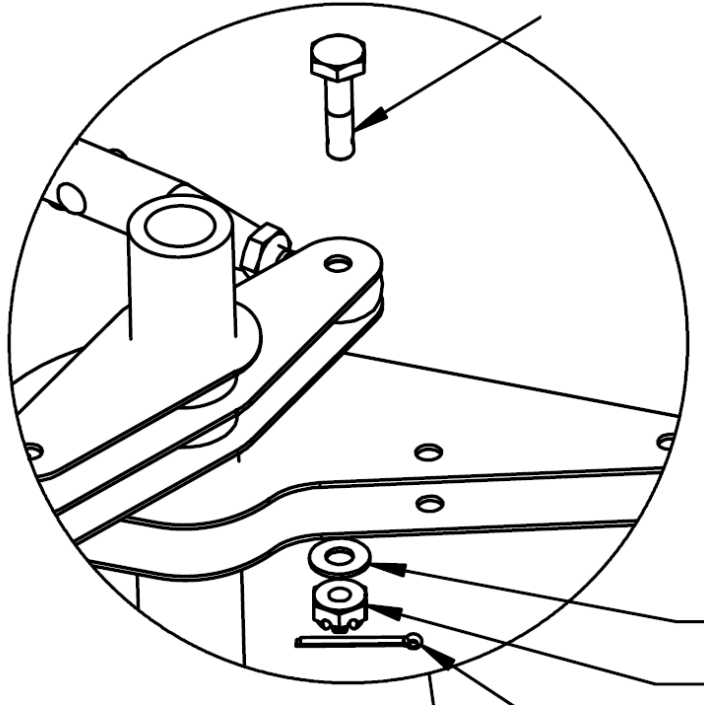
PUSH-PULL TUBE ASSEMBLY – AILERON BELLCRANK
